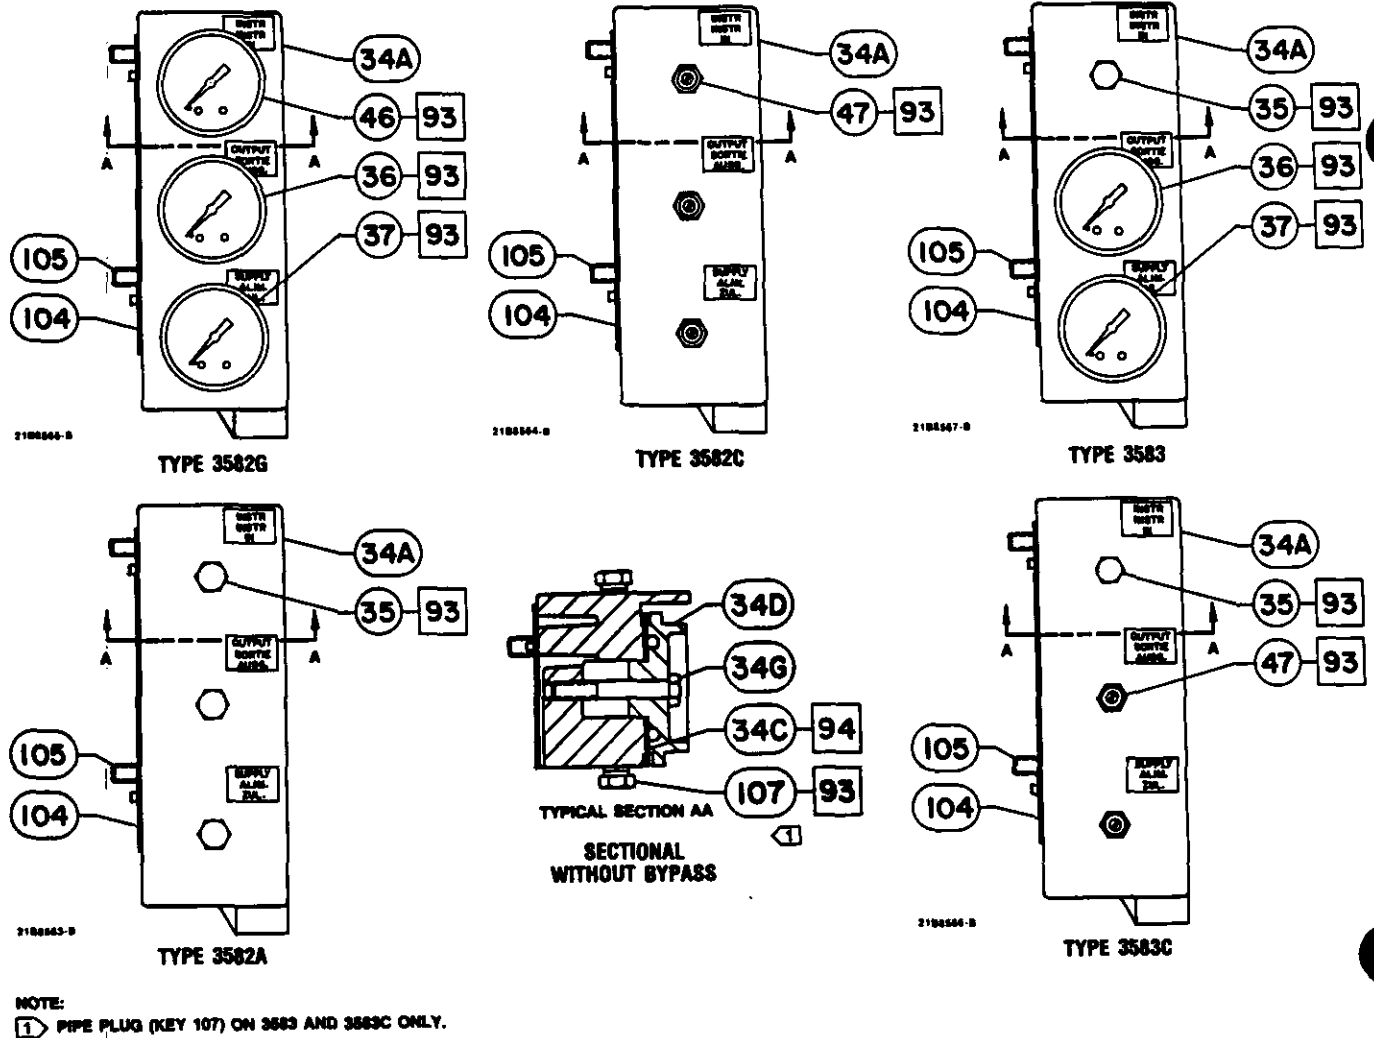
3582 and 3583 Series Block Assemblies without Bypass
